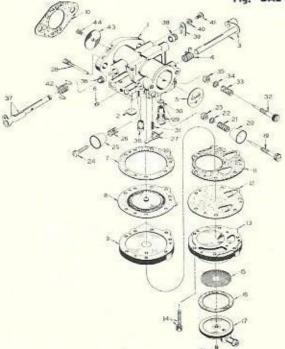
Exploded view of typical Tillotson carburetor used on Canadien chain saws. Screw cups (20 and 25) are not used on all models.
